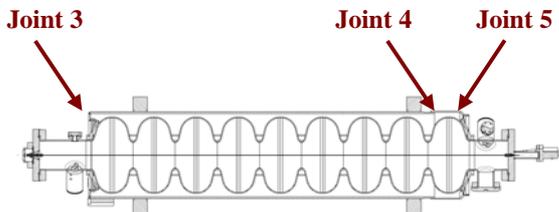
Weld sequences at TIG welding the Helium vessel
